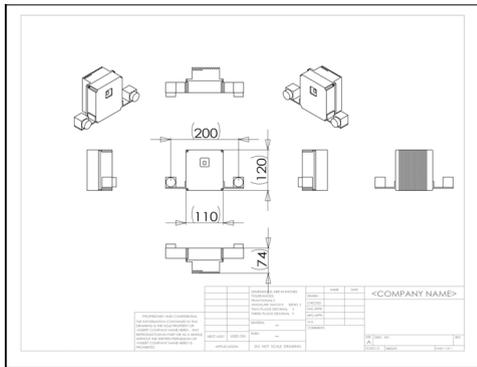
2D CAD Drawing of Stereo Vision Camera Module
